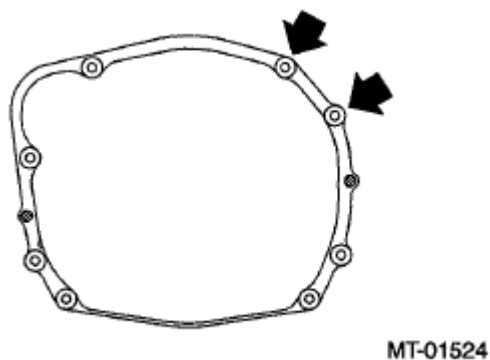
Locating Bolts Which Hold Upper Side Of Transmission To Engine - MT Model
